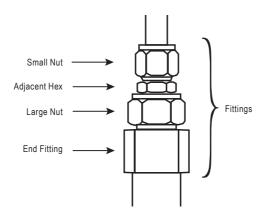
Close-Up: Fittings of the Packing Gland Assembly
